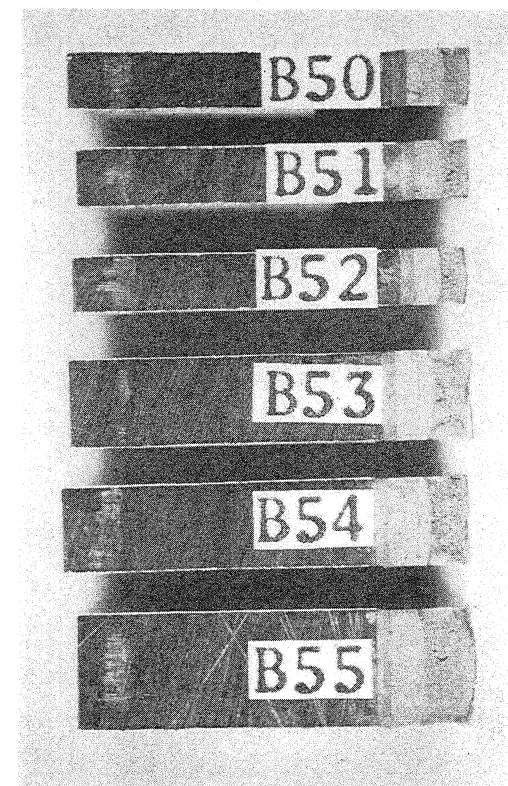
C Fracture Surfaces of Thick Bend Specimens ($S_y = 174$)
